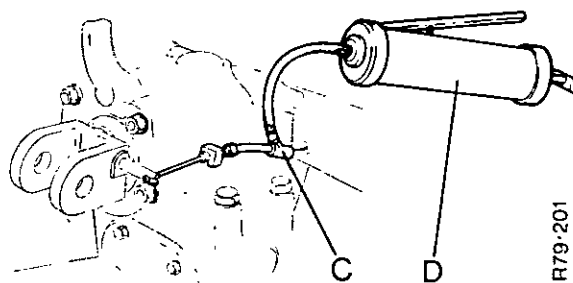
TESTING THE CABLE FOR THE SENSING UNIT
